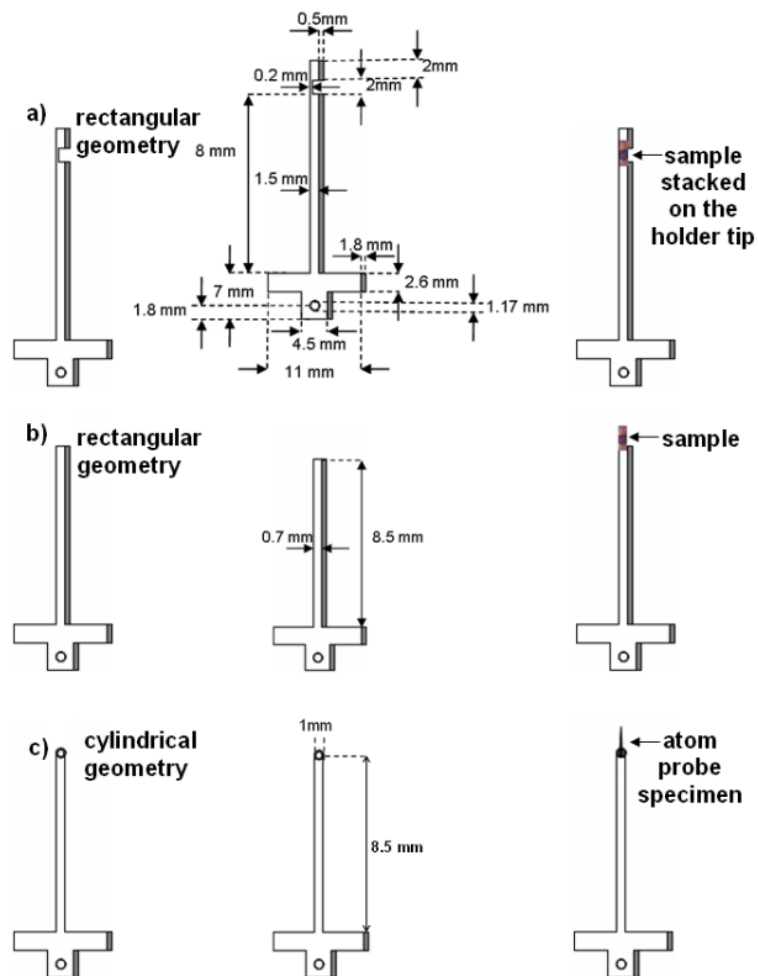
Holder tips used for tomography in MATEIS. a) Copper rectangular geometry with a notch; b) steel rectangular geometry without a notch; c) cylindrical geometry compatible with samples adapted to APT [Benlekbir2009, thesis].
